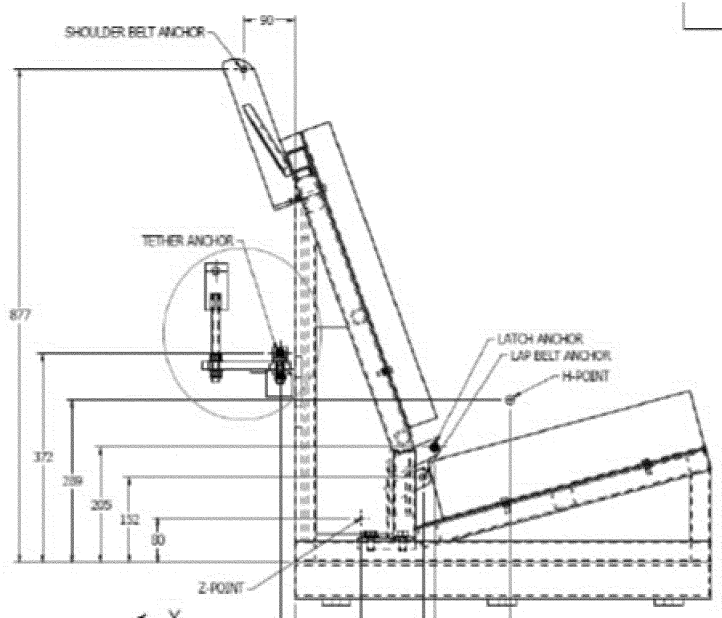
Detail from Drawing 3021-1000 Bench Seat Schematic Showing Tether Anchor Mounting (Circled) (Figure provided by Graco).
